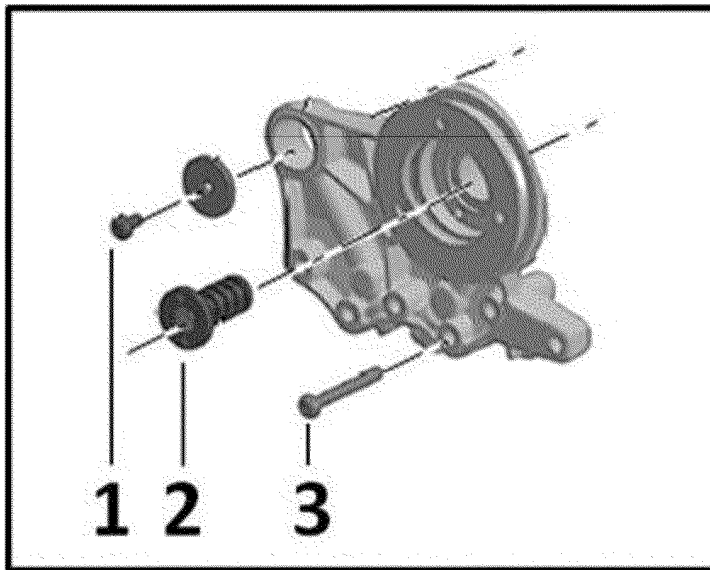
(1) Replace bolt. (2) Control valve. (3) Bolt.
